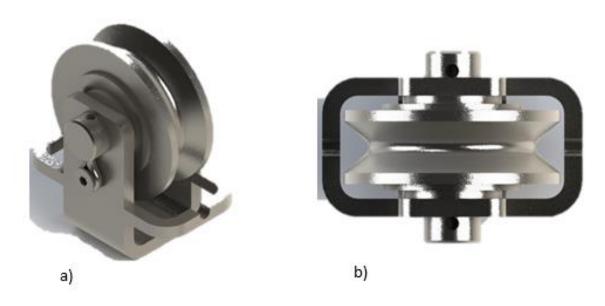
Heavy duty steel pulley with the pulley mount: a) isometric view, b) left view.
